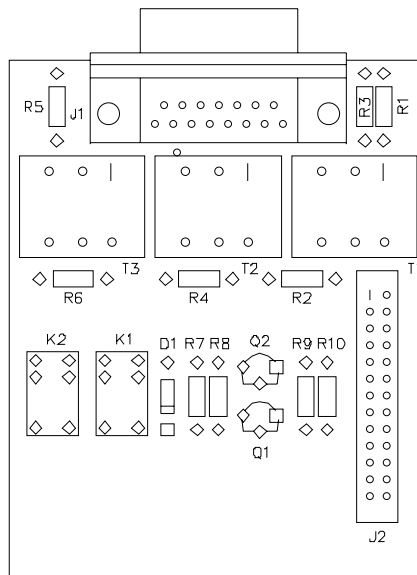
Assembly Drawing—OPT-100 Module Rev. A
